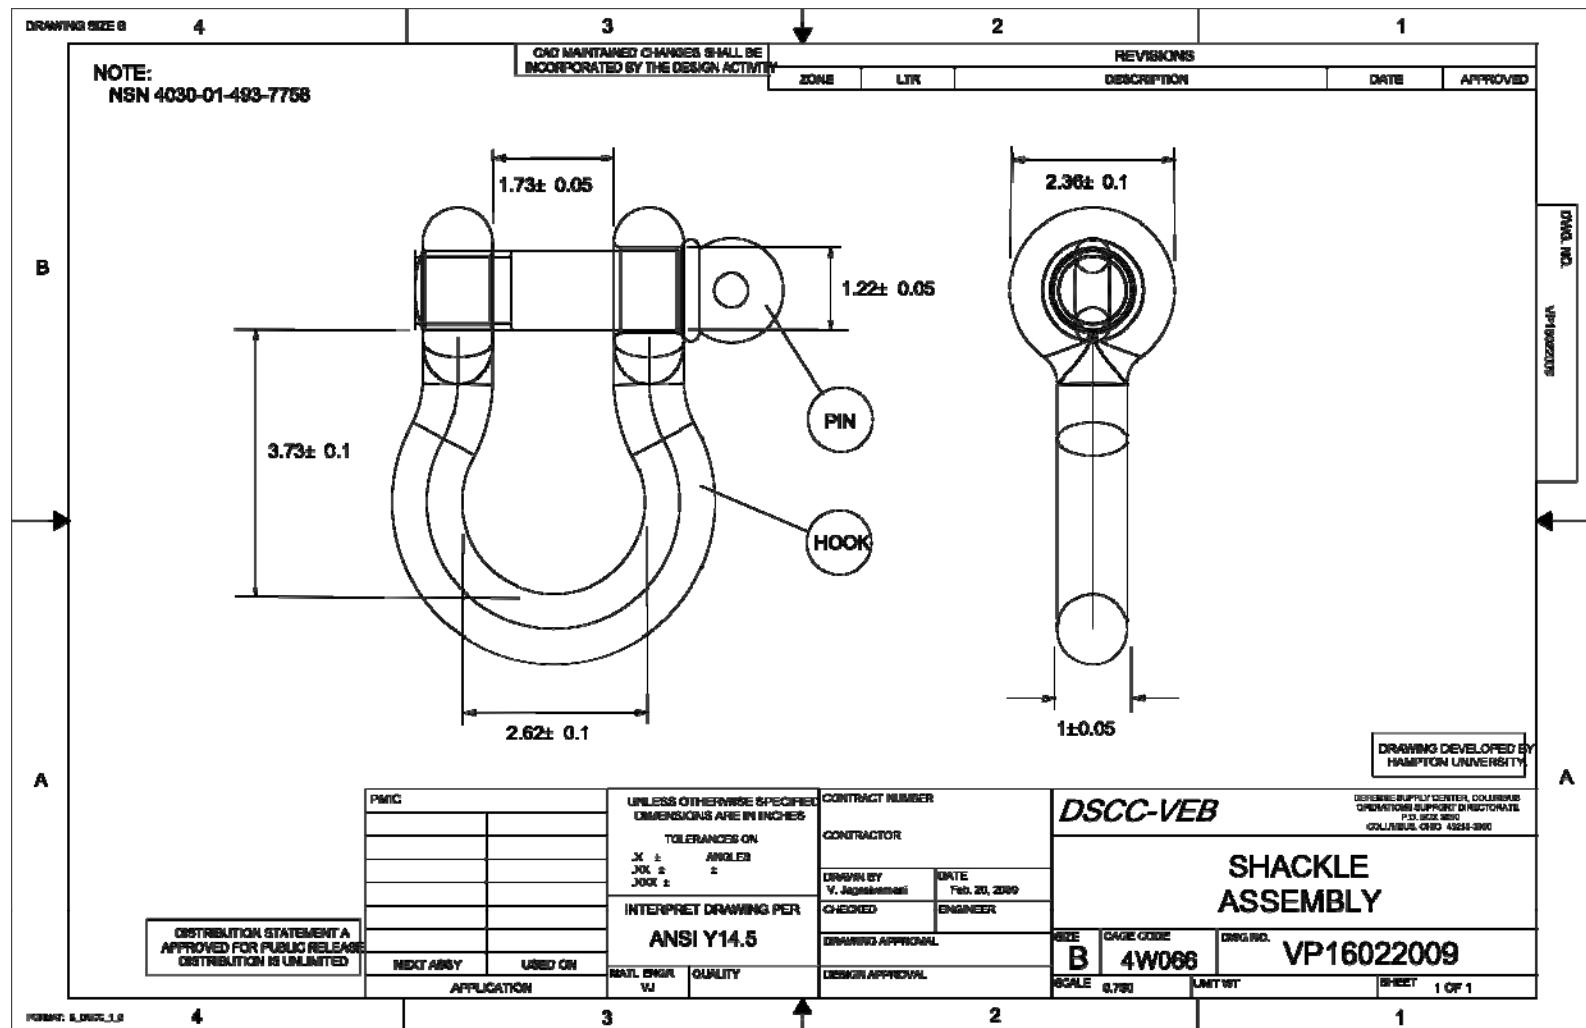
CAD drawings for the shackle for DSC, Columbus, OH.
